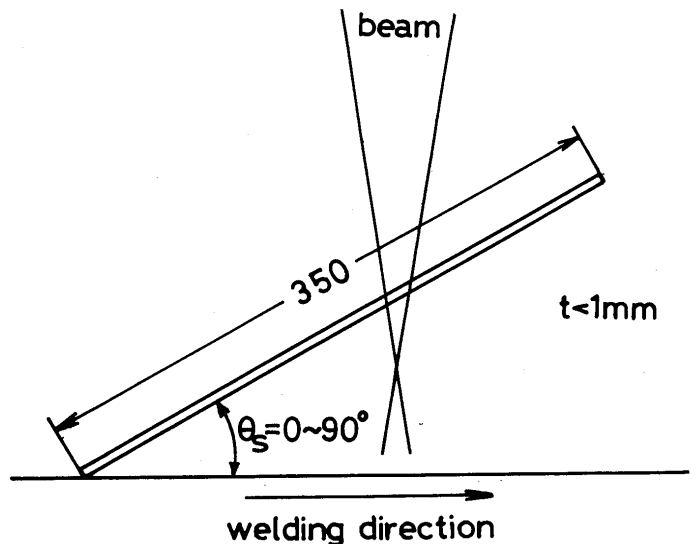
Schematic drawing of slope welding with thin plate.
